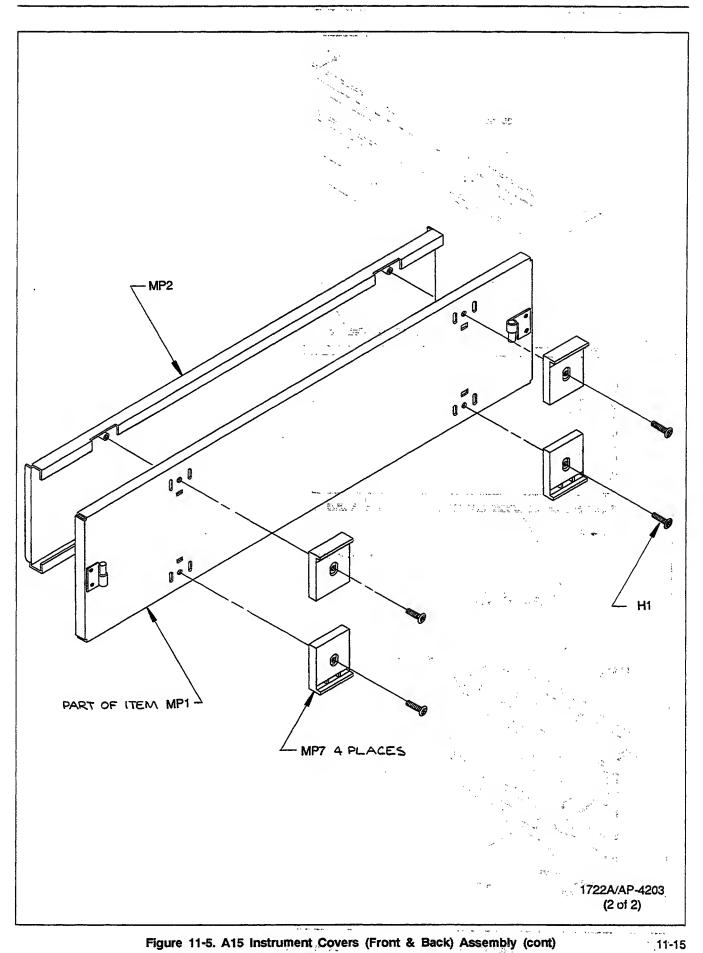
A15 Instrument Covers (Front & Back) Assembly (cont)
